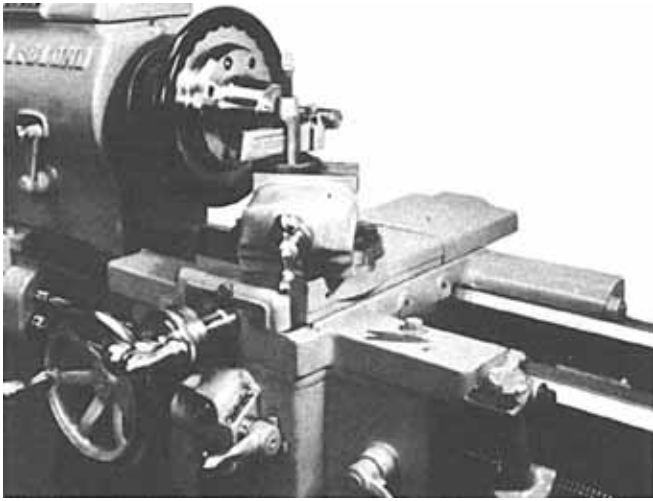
SJÖGREN TYPE COLLET CHUCK
